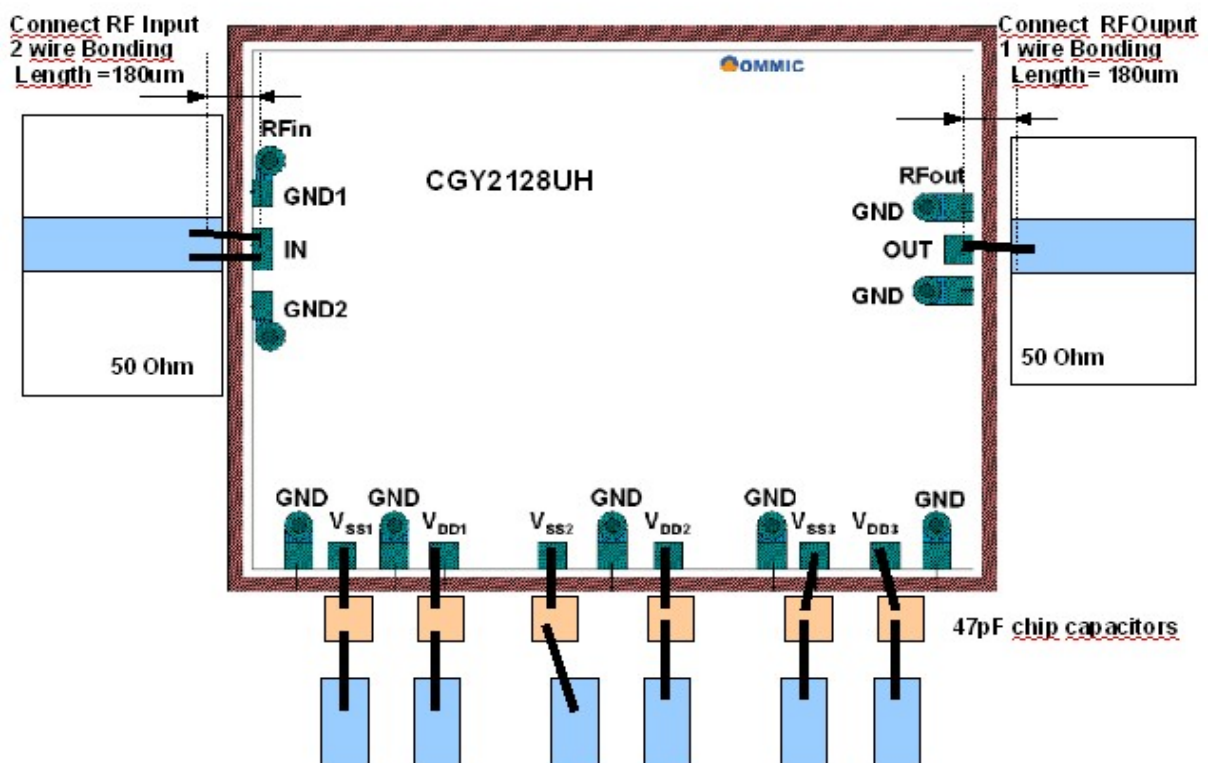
CGY2128UH/C1 module layout : Microstrip assembly
